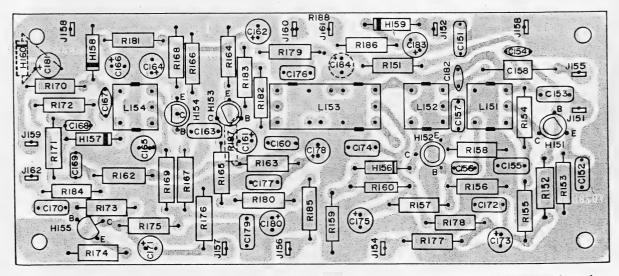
AM Tuner Unit Assembly P150 Component Locations
